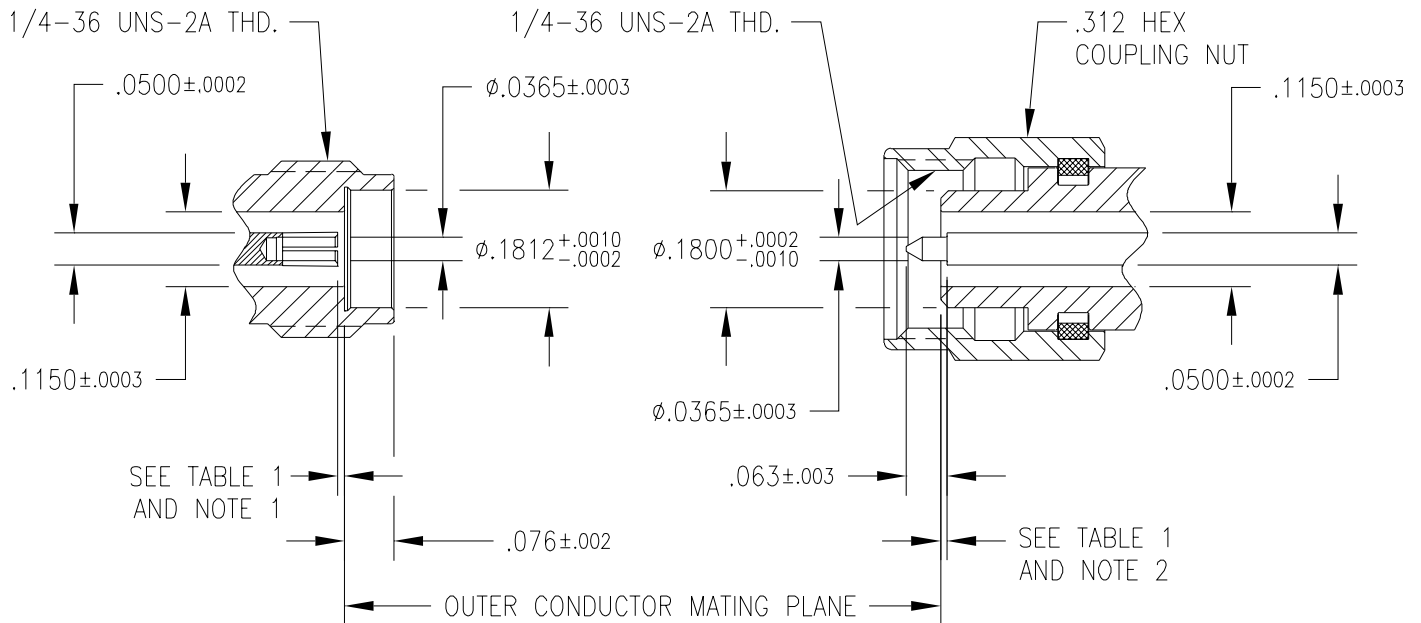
Critical Contact Pin Location Dimensions of 2.92mm Precision Connectors
